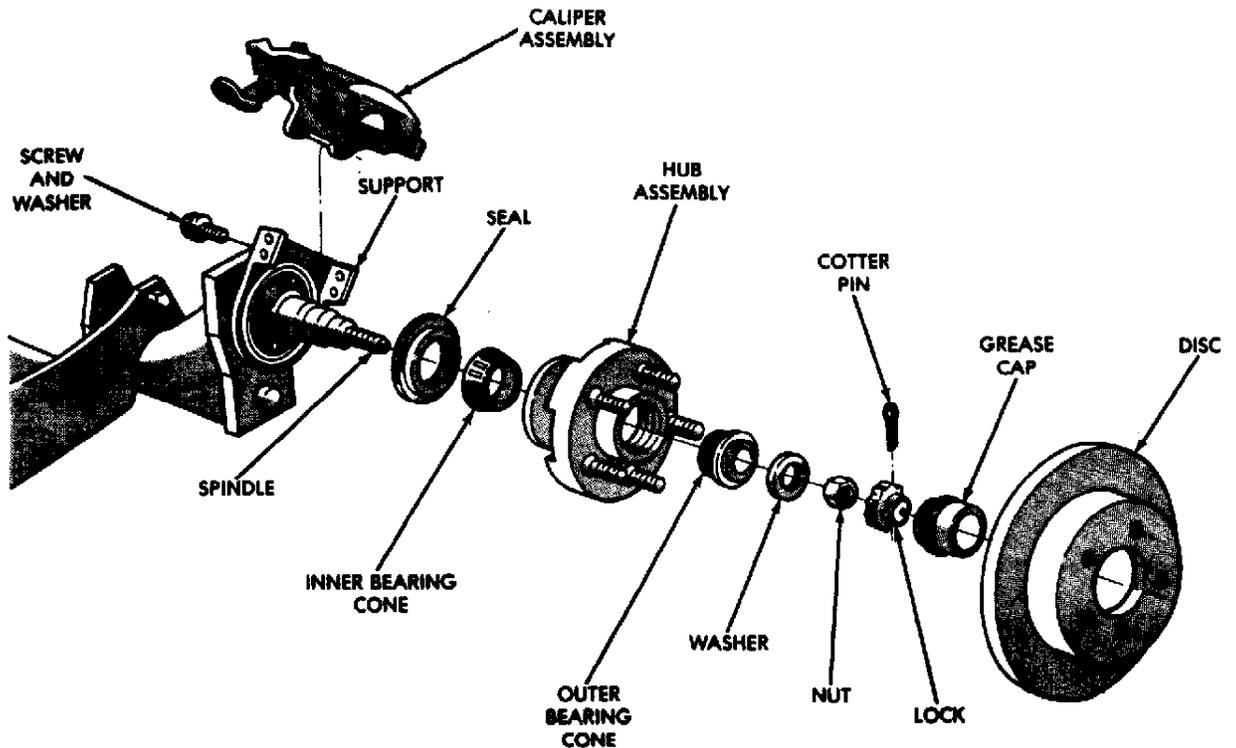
Exploded View of Daytona Rear Brake Assembly
